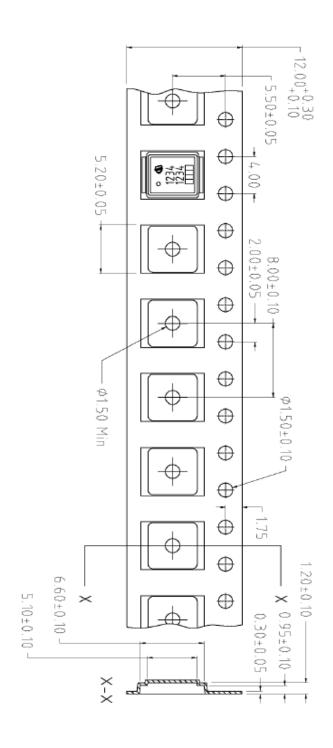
Outline Tape CanPAK MX, dimensions in mm
